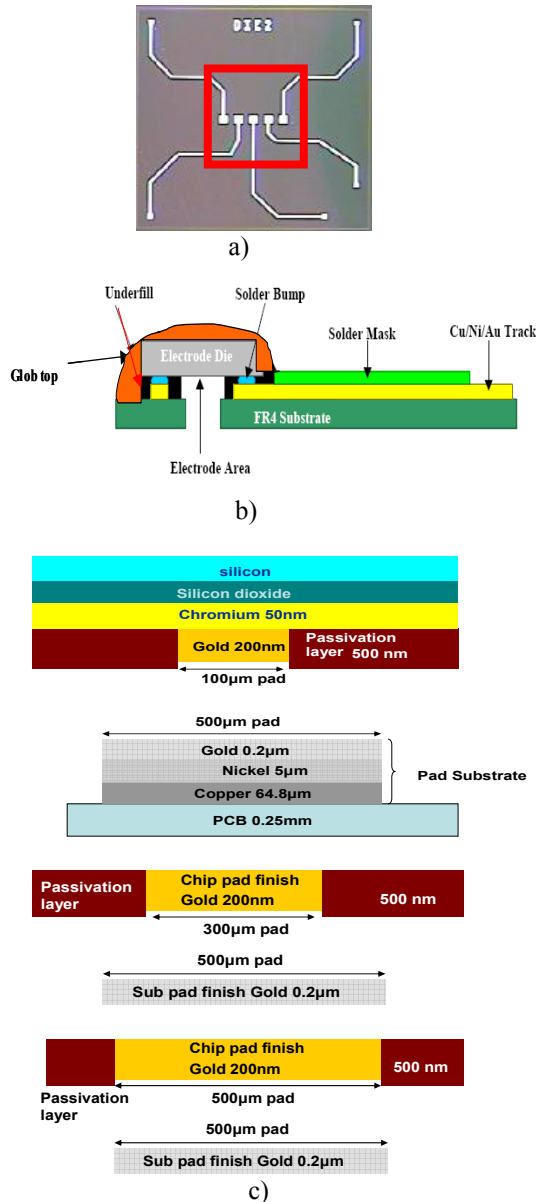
a) 6x6mm test chip used in the Flip Chip Over Hole (FCOH) development without passivation layer (board opening area indicated); b) Schematic of FCOH technology; c) Schematic of different chip-board contact pad ratio with the chip finish (top to bottom: ratio  $\text{chip}_{\text{pad}}/\text{sub}_{\text{pad}}$  0.2, ratio  $\text{chip}_{\text{pad}}/\text{sub}_{\text{pad}}$  0.6 and ratio  $\text{chip}_{\text{pad}}/\text{sub}_{\text{pad}}$  1.
